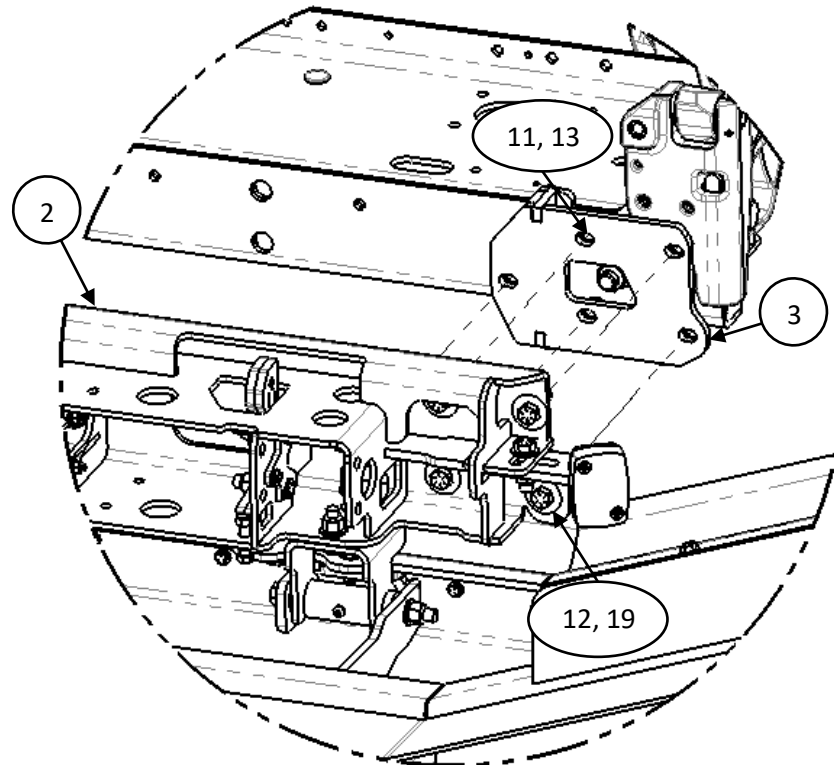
Universal Bracket Side Mounting Location (Driver Side Shown)
